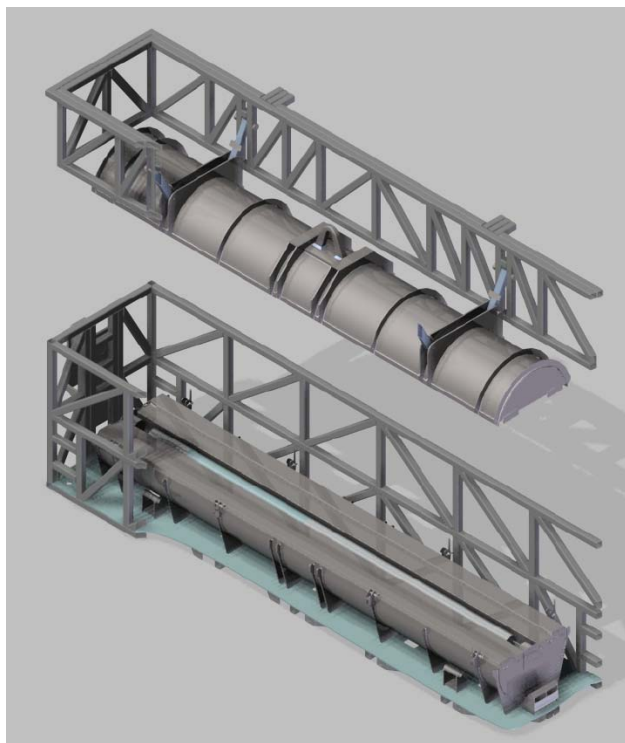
Mk-18A Cask with J-Can Assembly in Horizontal Position
